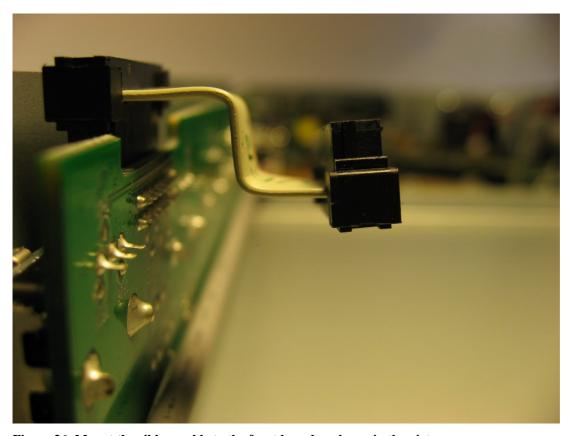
Mount the ribbon cable to the front board as shown in the picture.
